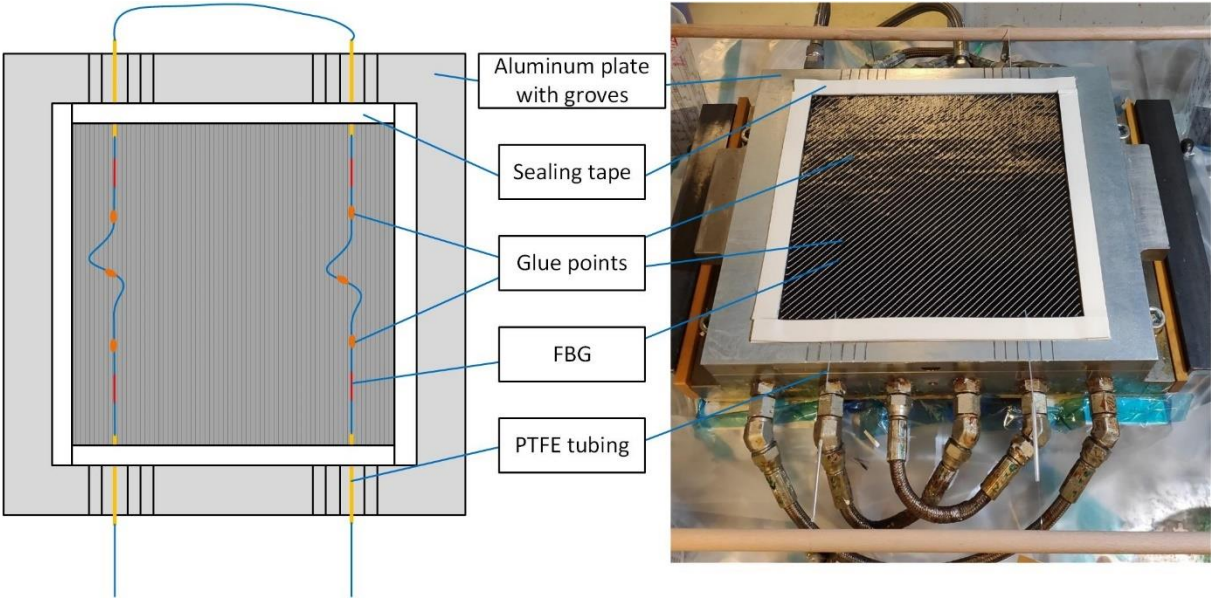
Integration of FBG sensors into the mold; a) Top view of the mold with preform.
